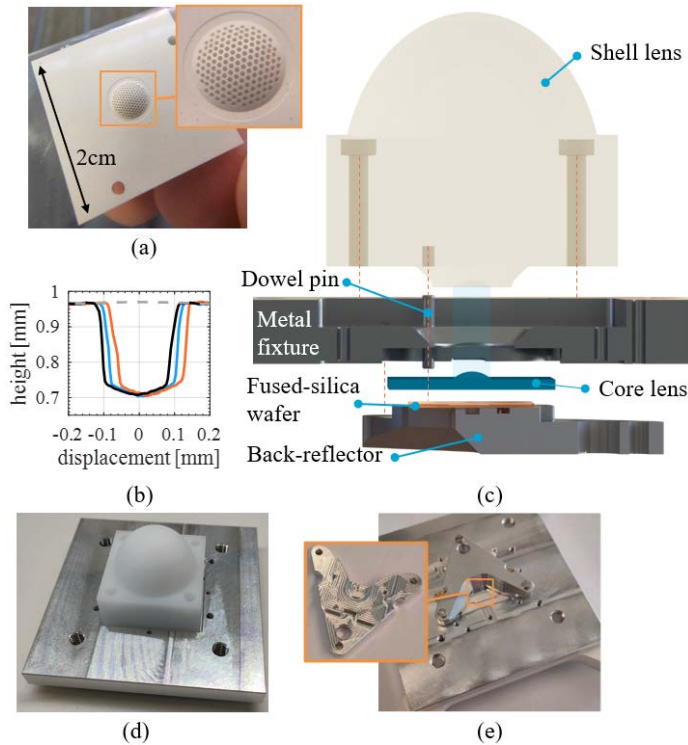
(a) Core lens prototype fabricated in PPE950 thermoplastic material. (b) Measured dimensions of the central hole along the 0° (blue), 60° (red) and 120° (black) axis. (c) Cross-sectional, exploded view of the antenna prototype assembly. Threads/dowel pin axes have been indicated in orange. (d) and (e) are photographs of the assembled core-shell lens prototype with a top and bottom view, respectively. The inset of (e) shows the upside-down view of the back-reflector.
